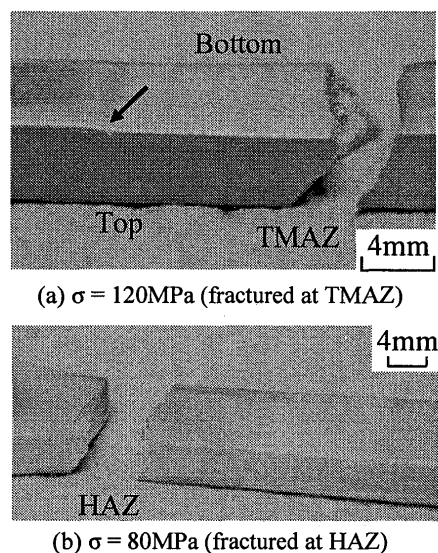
Photograph showing fatigue fracture (1200-200).
